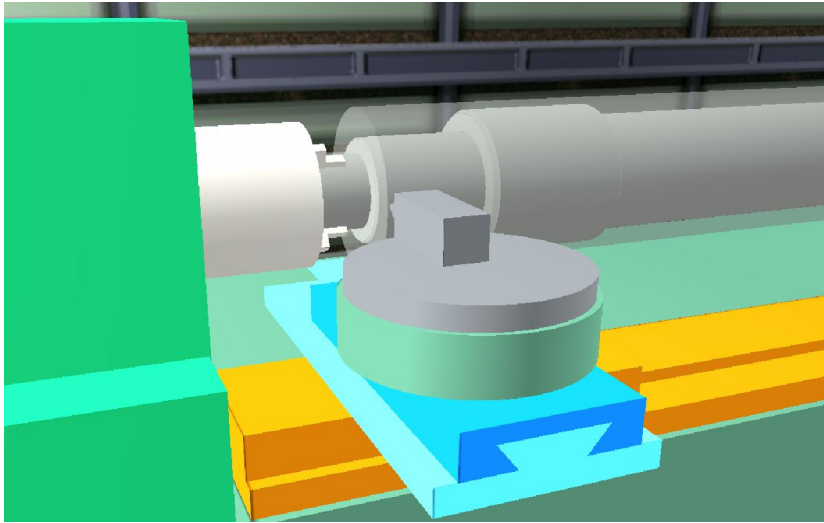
A view of the virtual environment. The reconfigurable machine tool configured as lathe
